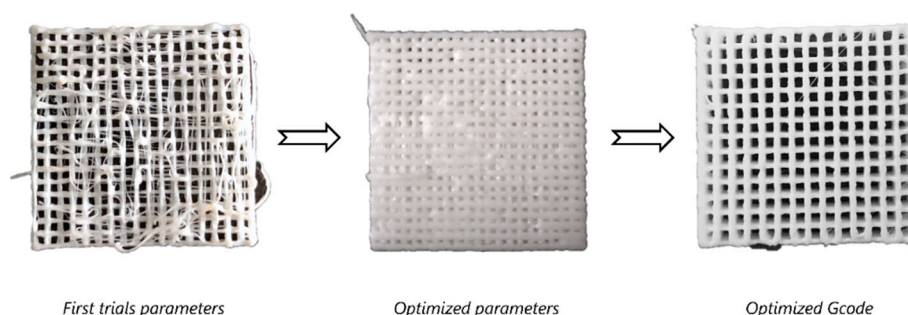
Optimization of the polyurethane printing process. Initial trials were performed to print samples, but clear defects can be macroscopically observed (left). Printing parameters were then optimized, but the movements of the printing head lead to undesired deposition of material (center). Finally, the G-code was optimized to obtain scaffolds with controlled printed geometry (right).
